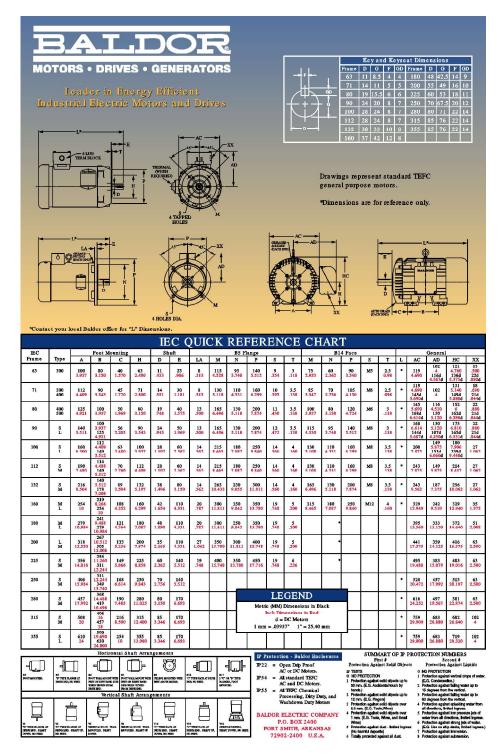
IEC motor dimension chart (Courtesy of Baldor Electric Company).
